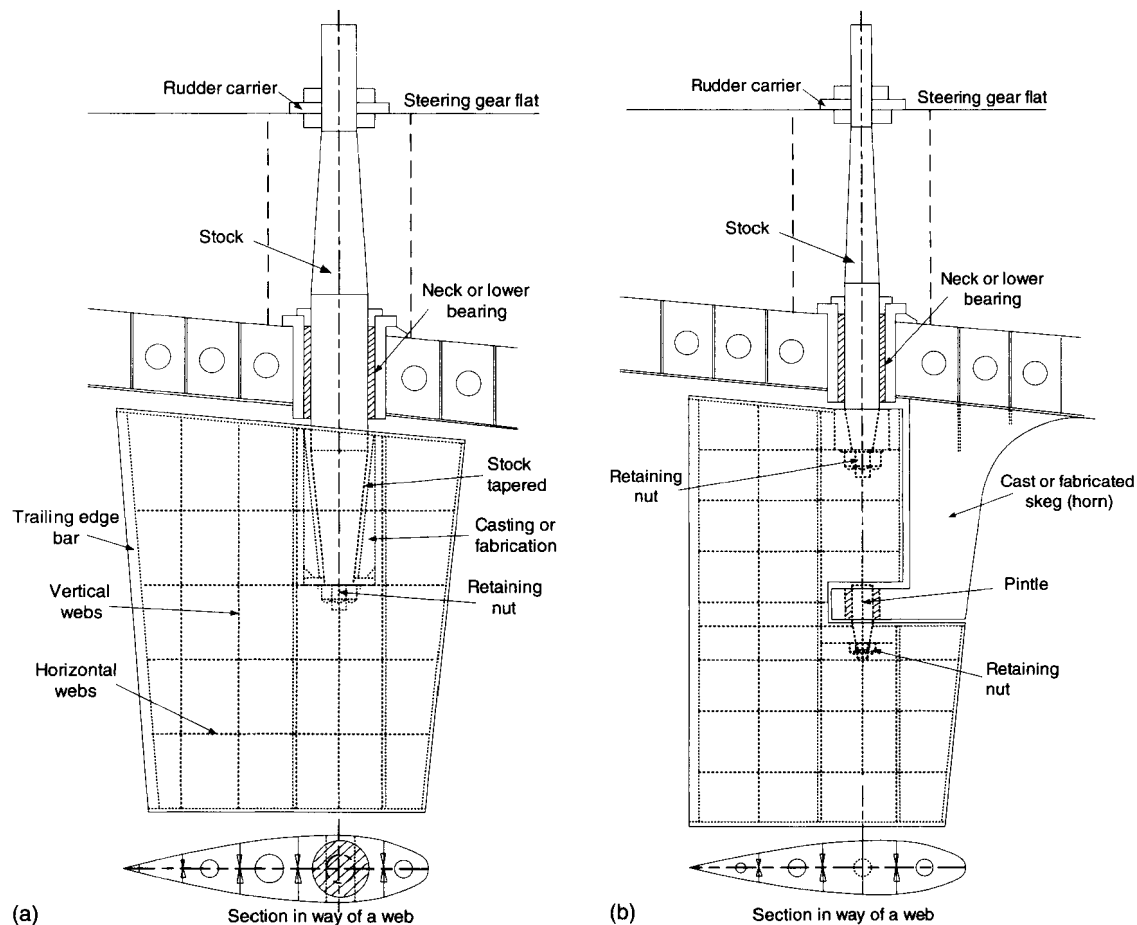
(a) Structural layout: spade rudder; (b) Structural layout: skeg rudder
